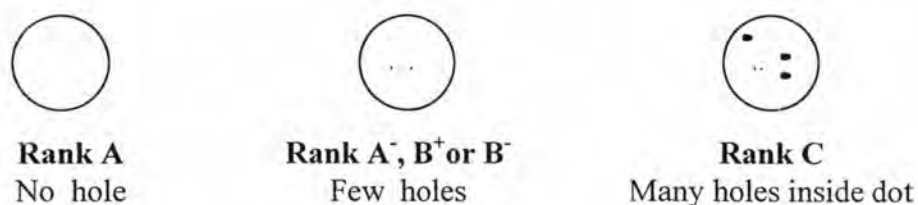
Pin hole appearance for rank judgement<sup>a</sup>
